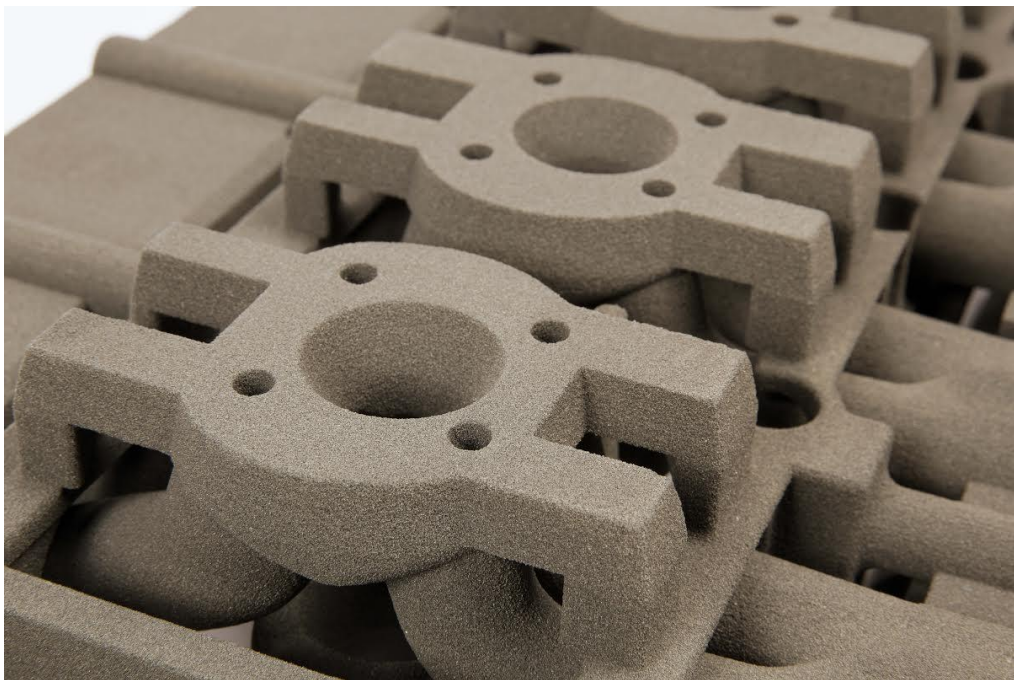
Sand part 3D printed in a Voxeljet machine (Hipolite, 2014)
